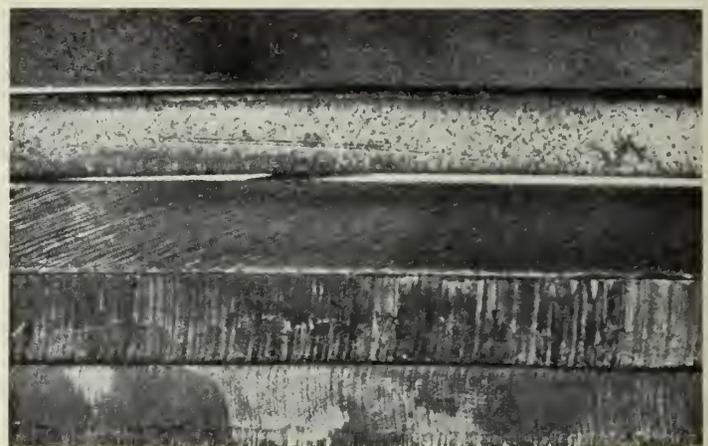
Appearance of Cut Surfaces Resulting from the Five Cutting Procedures Under Test (from Top to Bottom: Machined, Sheared, Friction Sawed, Hand-Torch Cut, and Machine-Flame Cut).
